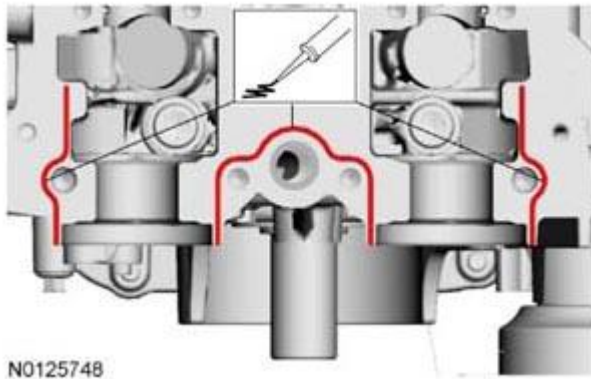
Identifying Gasket Maker Applying Area To Cylinder Head
